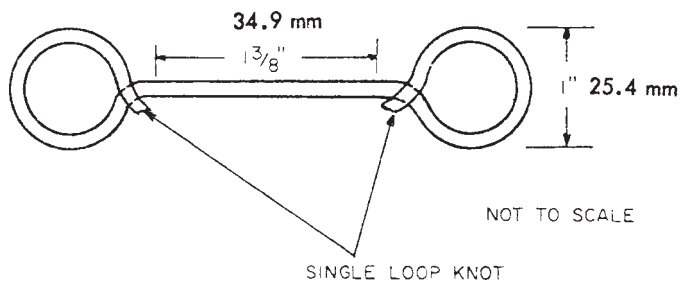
Tension Specimen for Tubing Less Than 2.29 mm
